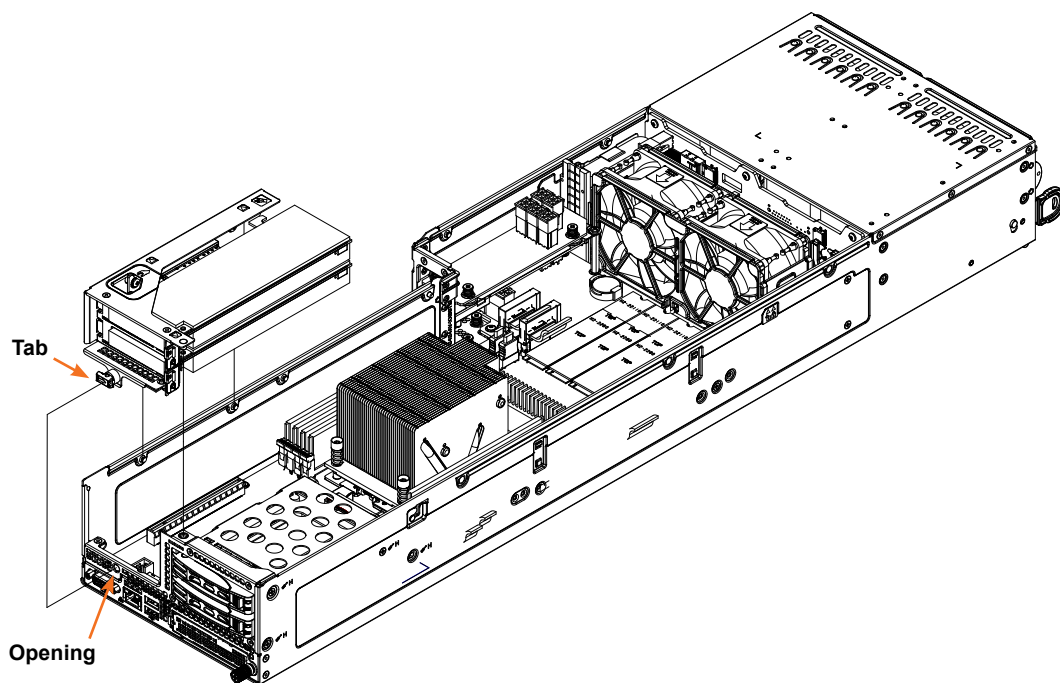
Installing the PCIe Slot Bracket Assembly (w/ 2.5" rear drive bays)
